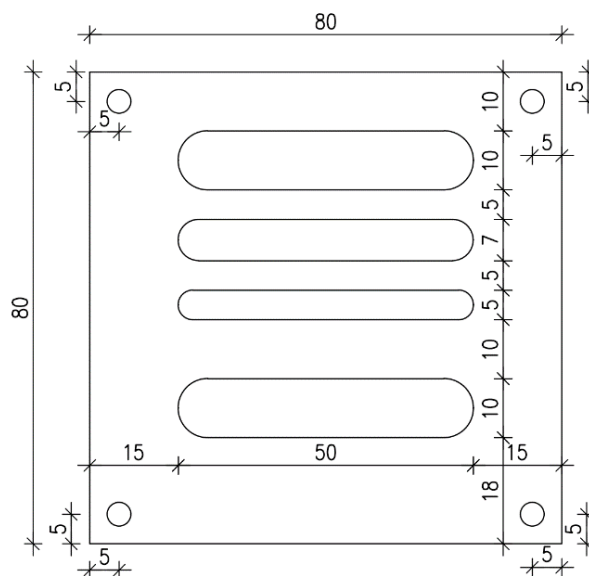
Aluminium mask model for testing a design concept, all measurements in millimetres.
